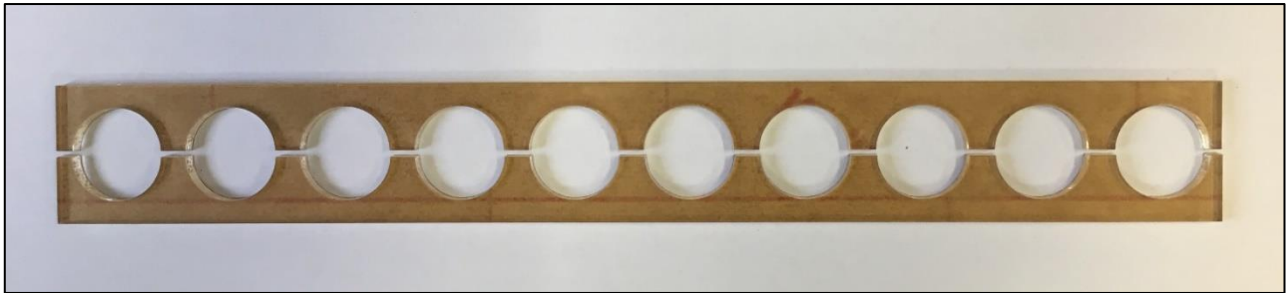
Acrylic part gap fixture for the robotic spot welder
